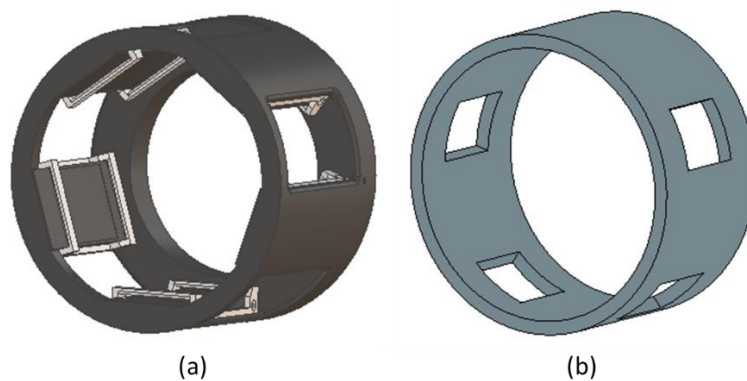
CAD models of (a) the 3D printed fixture inside the lead tube used to hold PSP assemblies, and (b) the lead tube with four pocket openings.
